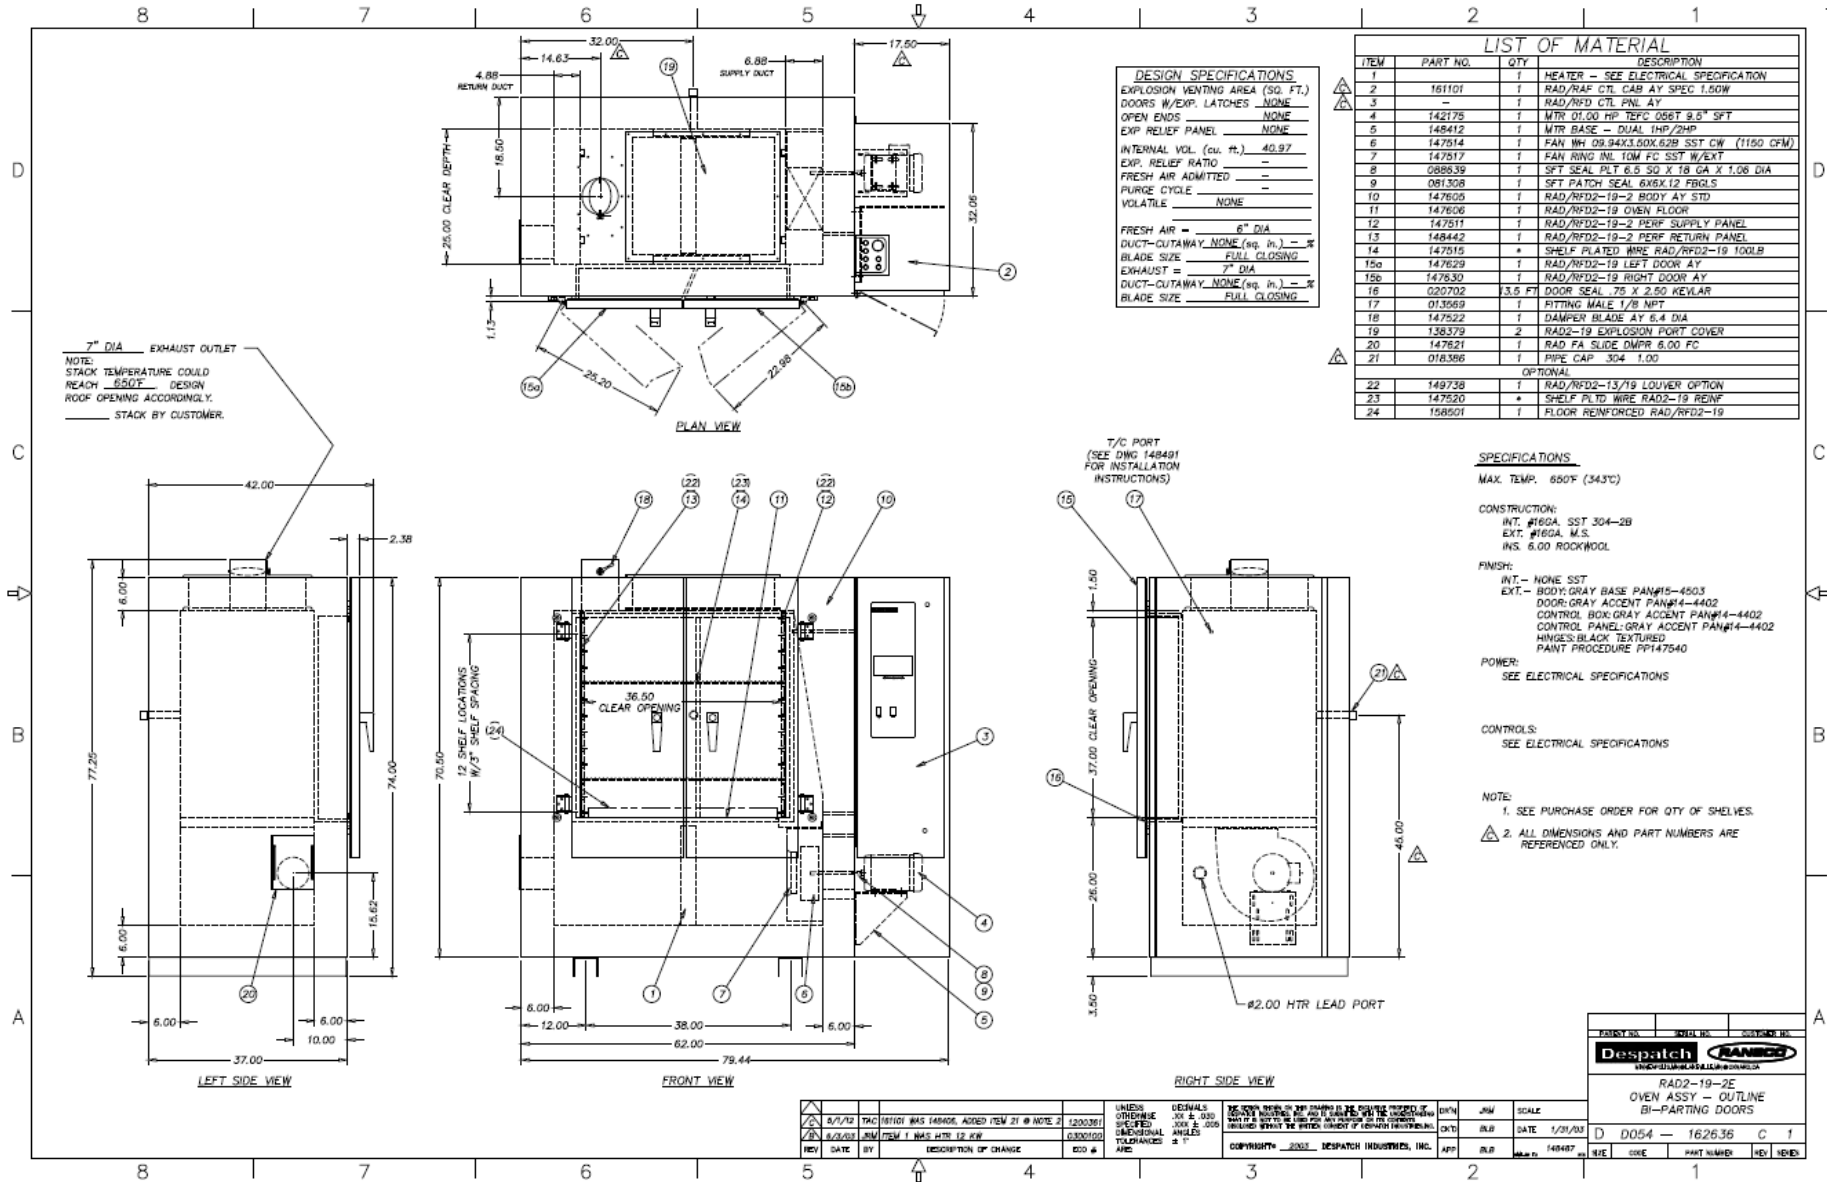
RAD2-19-2E, Oven Assembly (Drawing 162636-01).
